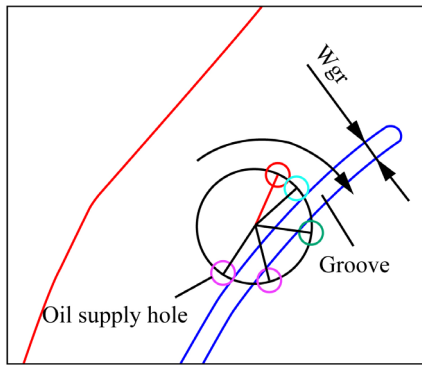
Intermittent connection of oil supply hole to thrust oil groove.
